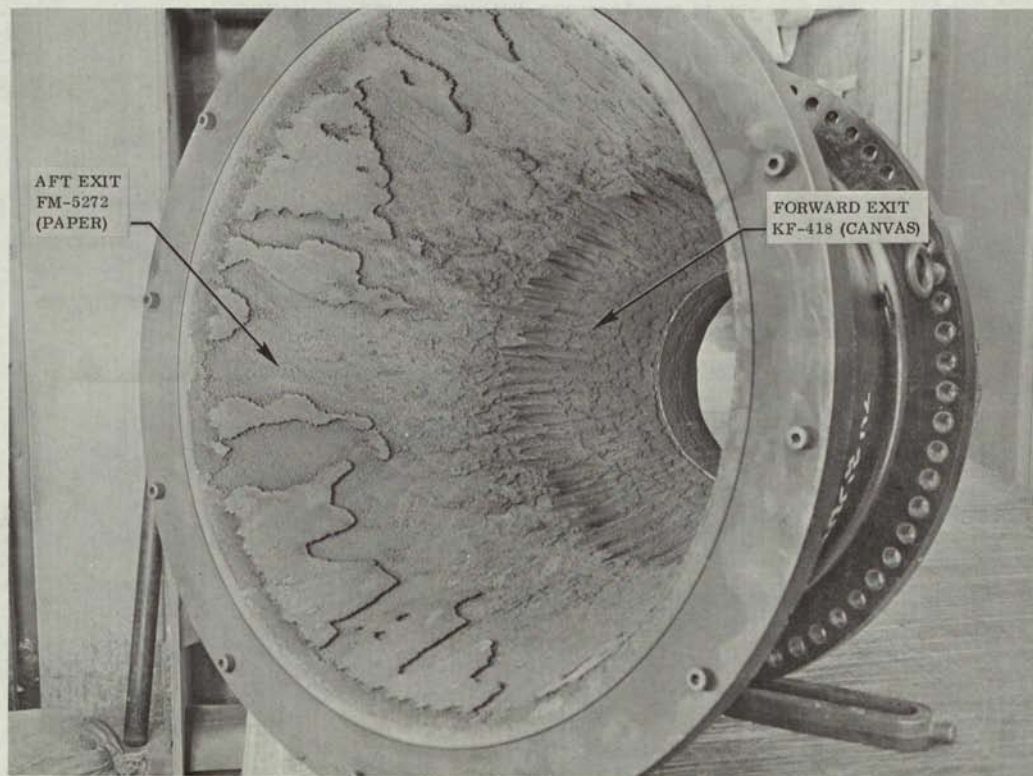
Sectioned Nozzle No. 6 Submerged and Exit Cone Liners
